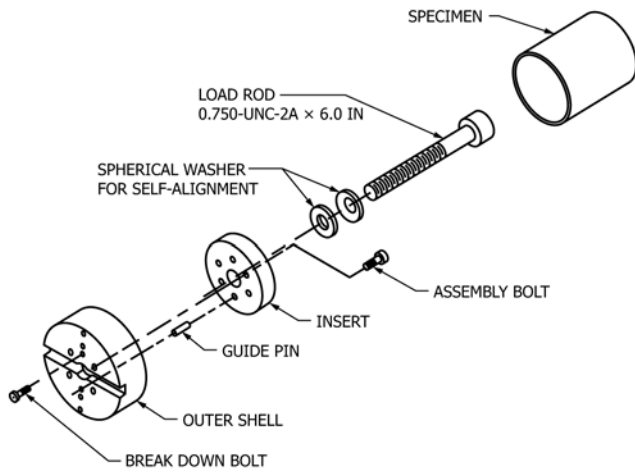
Assembly Drawing for Tension Fixture and Specimen
